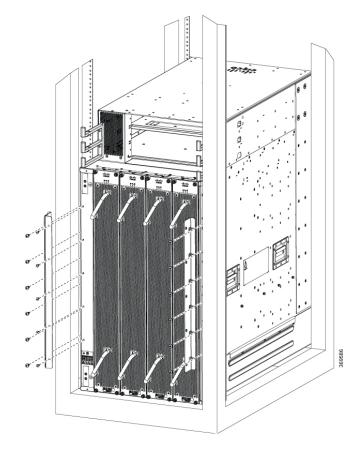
Attach 8818 Chassis to Rack - Rear Right View
